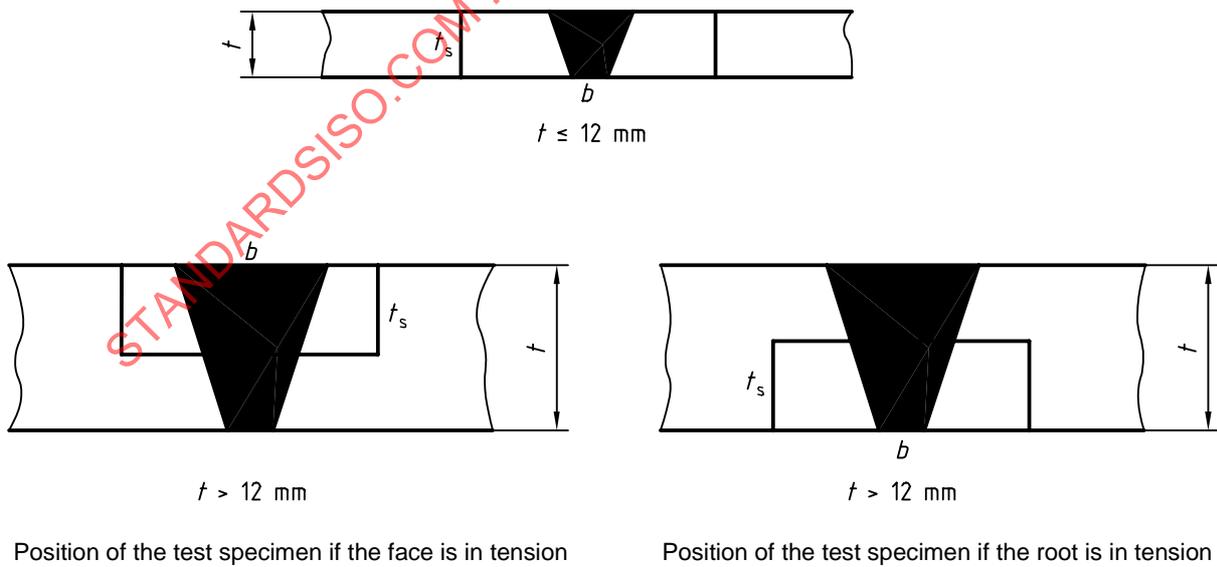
Longitudinal bend test specimens for a butt weld (RBB and FBB)
